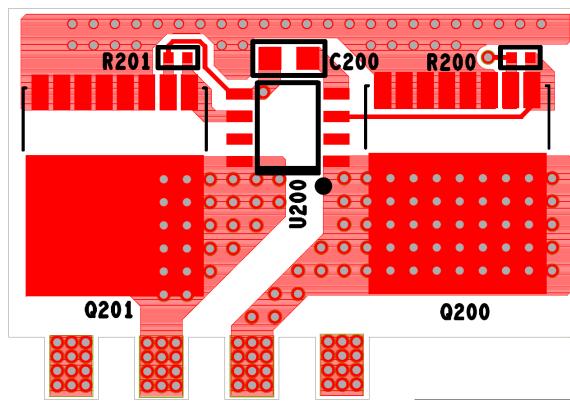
Main Board Printed Circuit Layout, Bottom.
